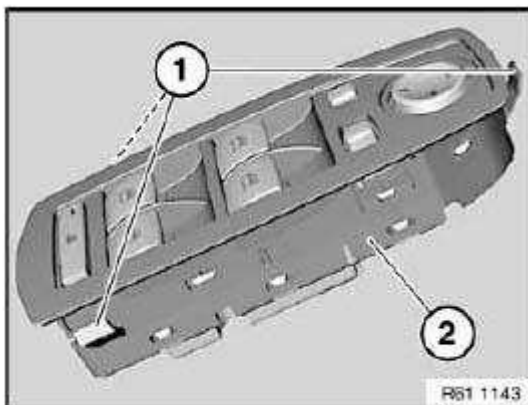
Identifying Retaining Hooks Of Rocker Switch
